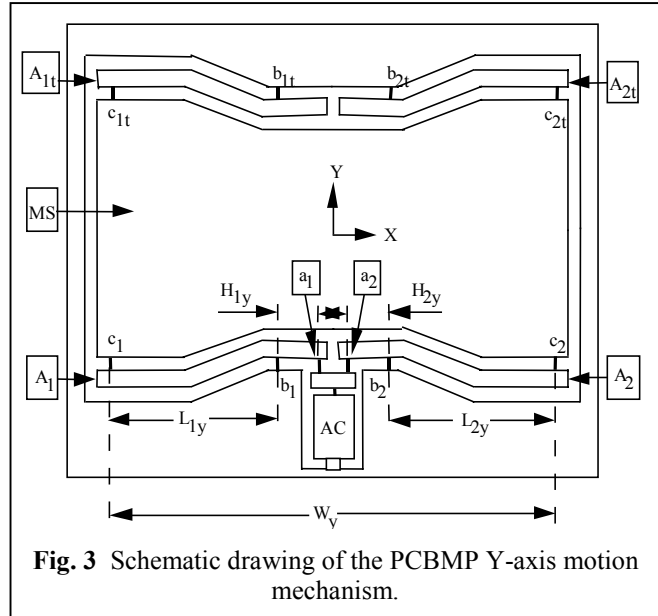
Schematic drawing of the PCBMP Y-axis motion mechanism.
